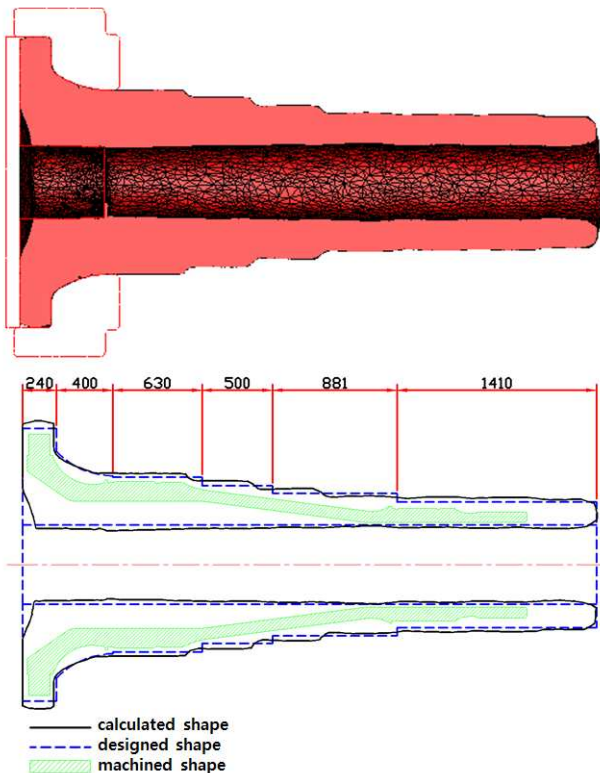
Profile comparison for calculated, forging designed and final machined shape
